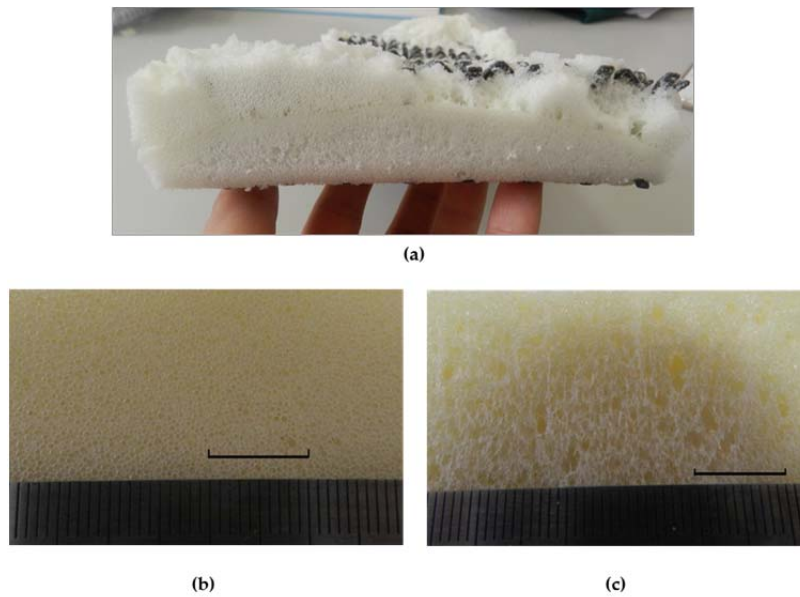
(a) Illustration of the denser layer due to the casting failure when manufacturing prototype; (b) illustration of casted base foam at room temperature; (c) illustration of casted base foam at 80°C.
